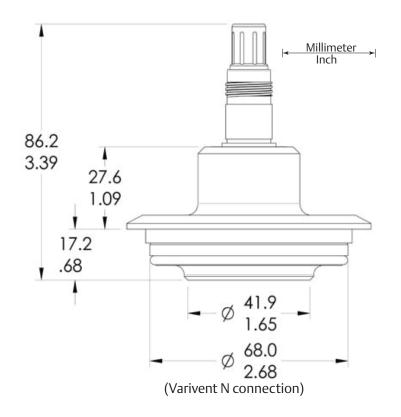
Rosemount 410VP-22 Conductivity Sensor dimensional drawing
